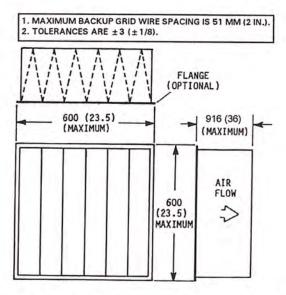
Final filter: cartridge form. Dimensions are in mm (in.).
